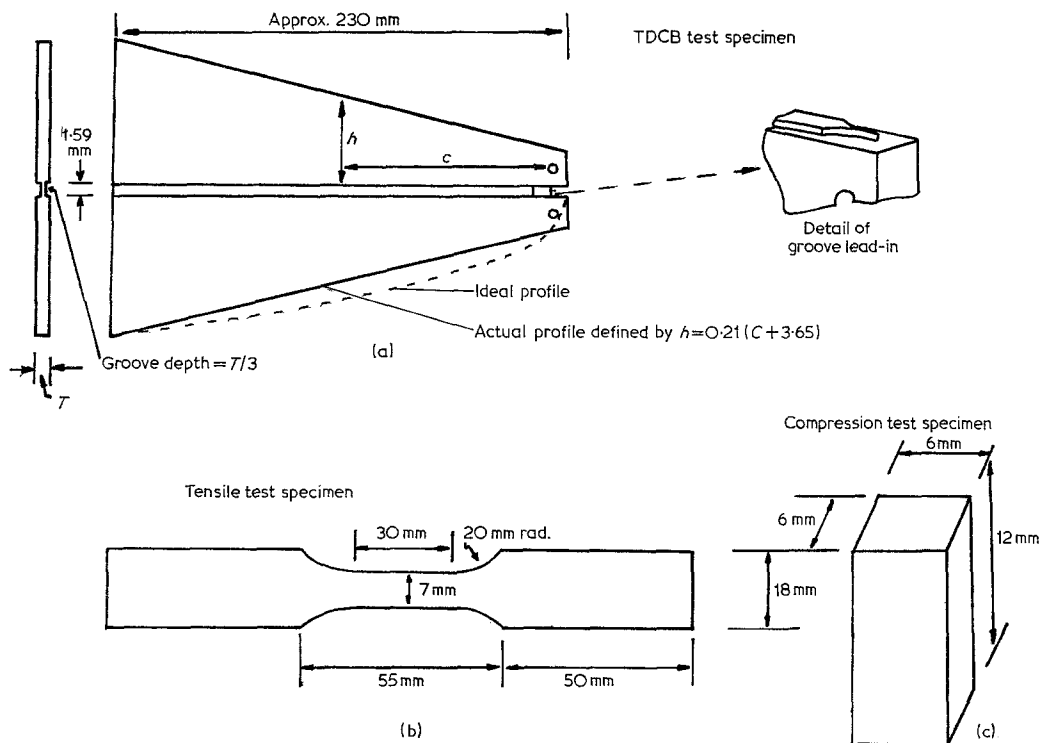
Test piece geometries (a) TDCB fracture-toughness test piece, (b) tensile test piece and (c) compression test piece.
